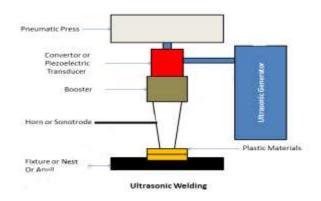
Ultrasonic Plastic Welding Machine
